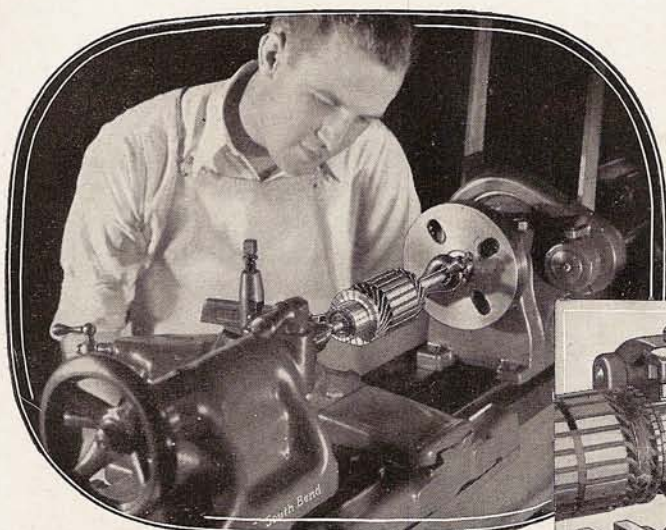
Truing an Armature Commutator in the 16-inch South Bend Lathe.
